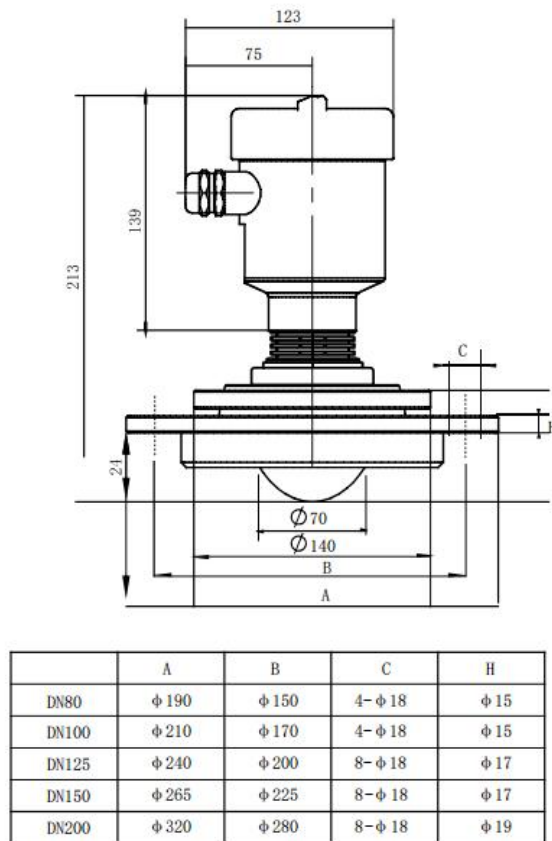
Universal flange with 3° beam angle in -40 ~ 200°C
